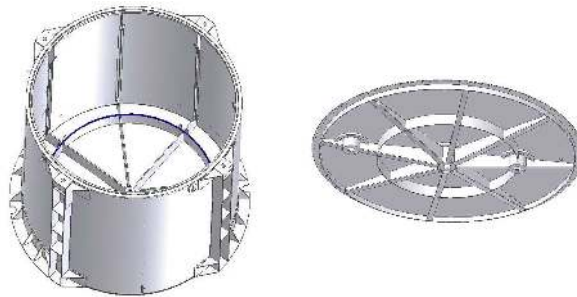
Stainless steel vessel (SSV). Left: barrel and bottom sections. Right: inner side of the tank lid.
